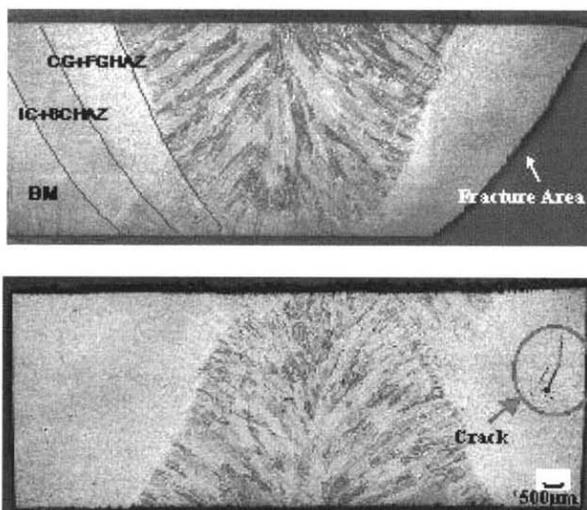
The macrographs showing SSCC tested specimens from SAW weldment.
